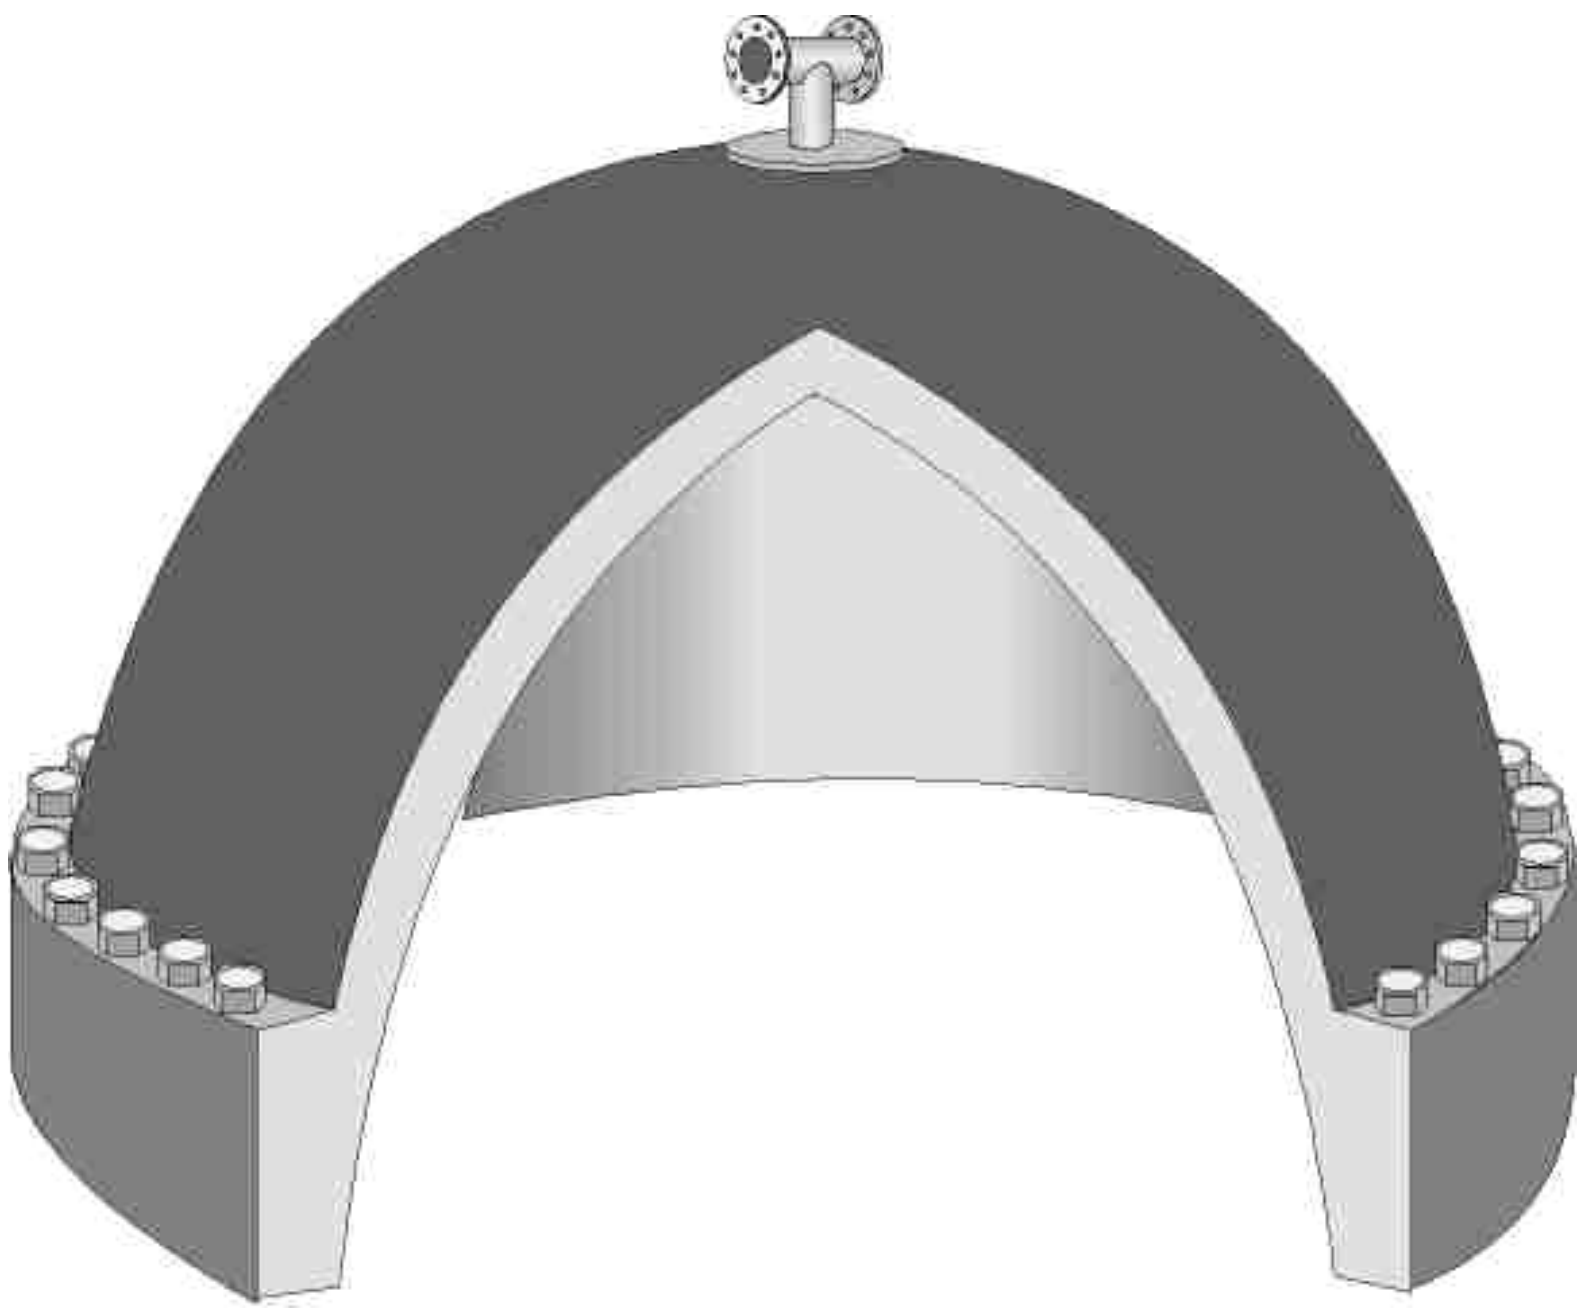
Shroud Head and Steam Separator Assembly
